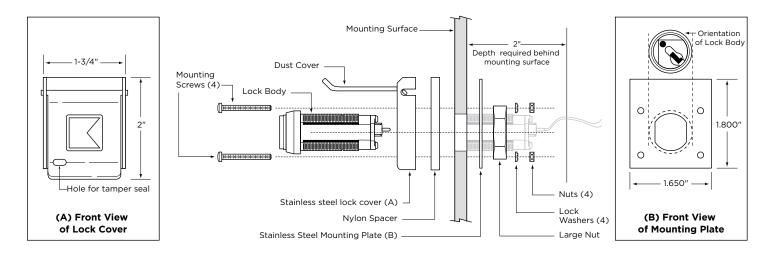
Key Switch with Stainless Steel Lock Cover Assembly
